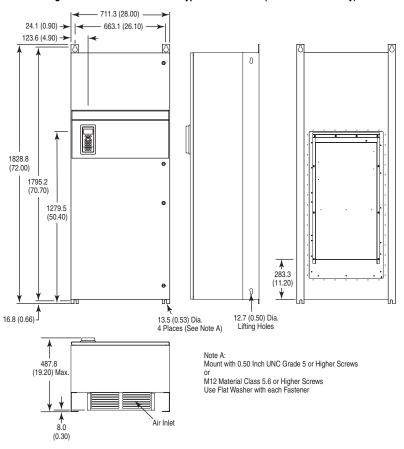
Frame 6 NEMA/UL Type 12 Standalone (400-690V drives only)
